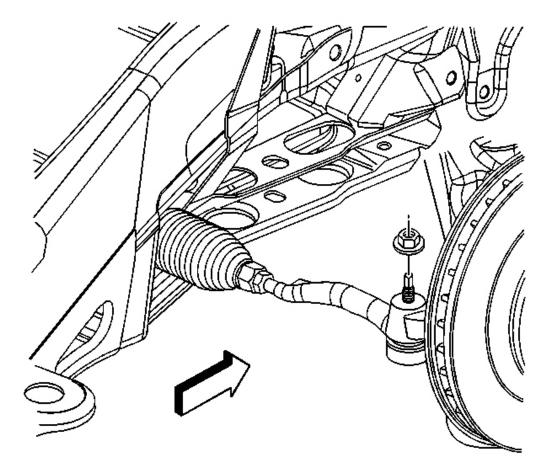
View Of Tie Rod Retaining Nut Courtesy of GENERAL MOTORS CORP.
